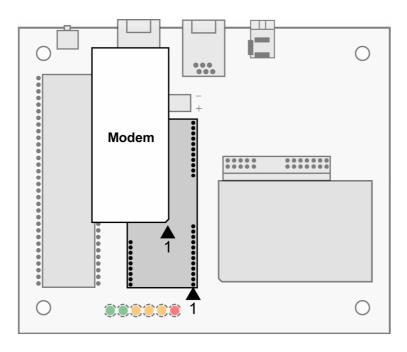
Mounting a modem on the MB/920-E2M Base Board
